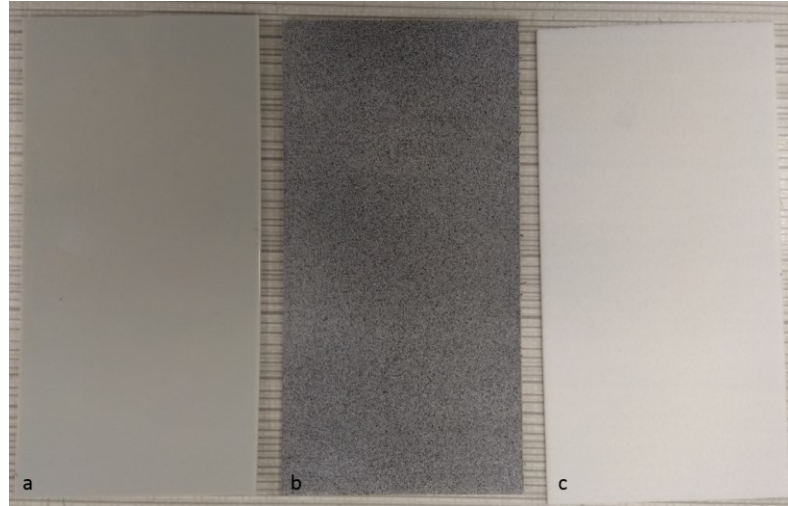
1mm thick specimens manufactured by injection molding (a), HP Multijet Fusion (b) and Selective Laser Sintering (c).
